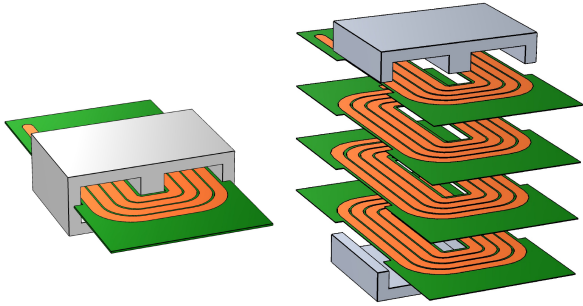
Representation of the layered structure of a PCB winding in planar transformers. Left: Planar transformer example. Right: Exploited vision of the PCB layers.
